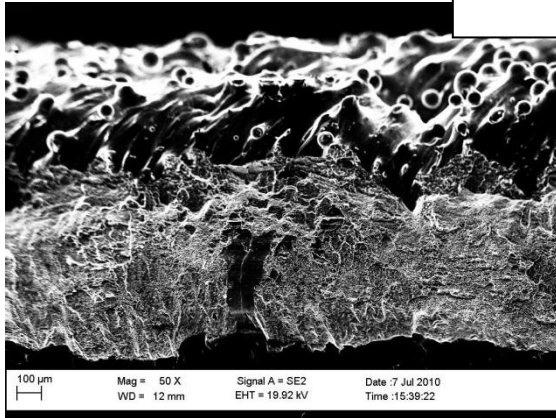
Fracture surface of the vertical specimen after tensile testing
